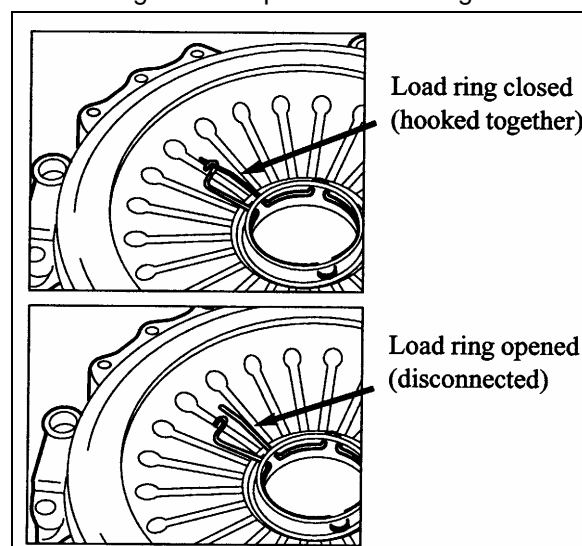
RELEASE BEARING RETAINING CLIP 07112
